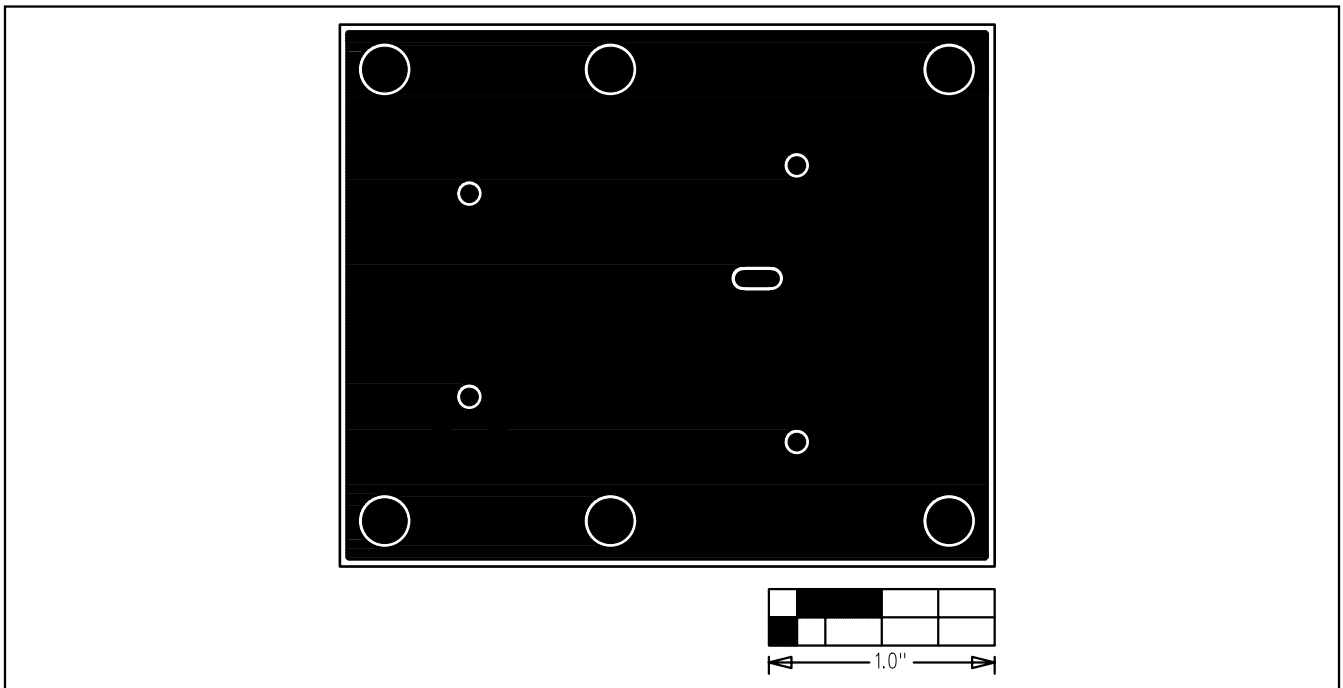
MAX9587 EV Kit PCB Layout—Solder Side
